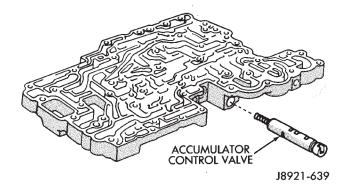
Removing/Installing Accumulator Control Valve Assembly
